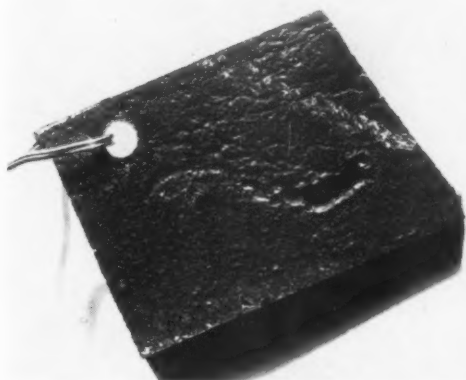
Casting defect, commonly called a "Seam," caused by spalling of the cope surface of a mold.
